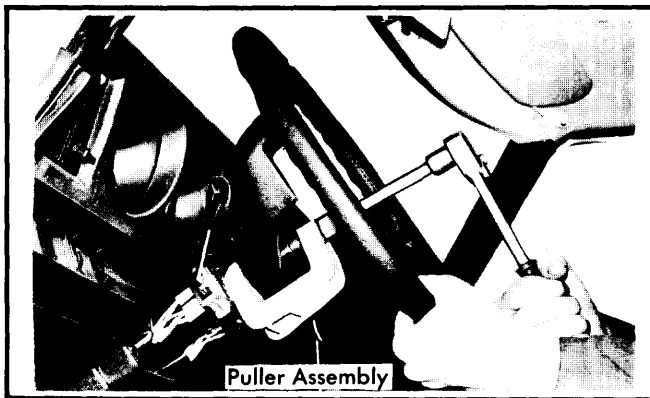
Using a Universal Puller Tool to Remove Steering Assembly
